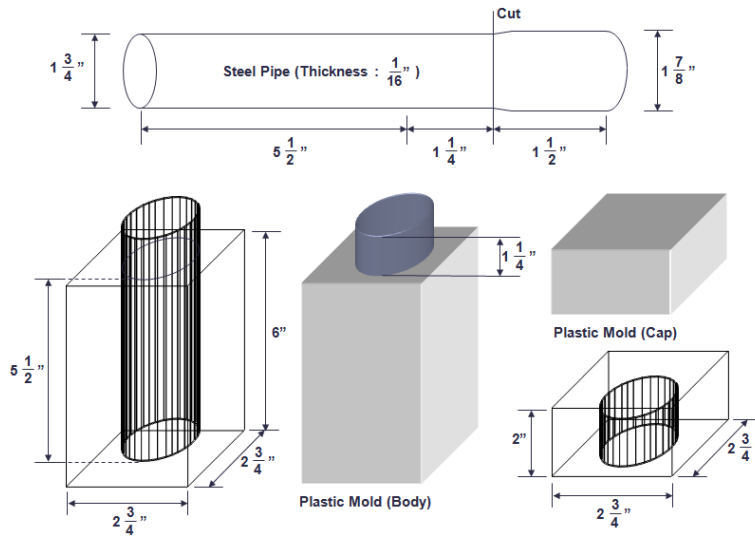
The dimensions of the preliminary test specimen (PTS)
